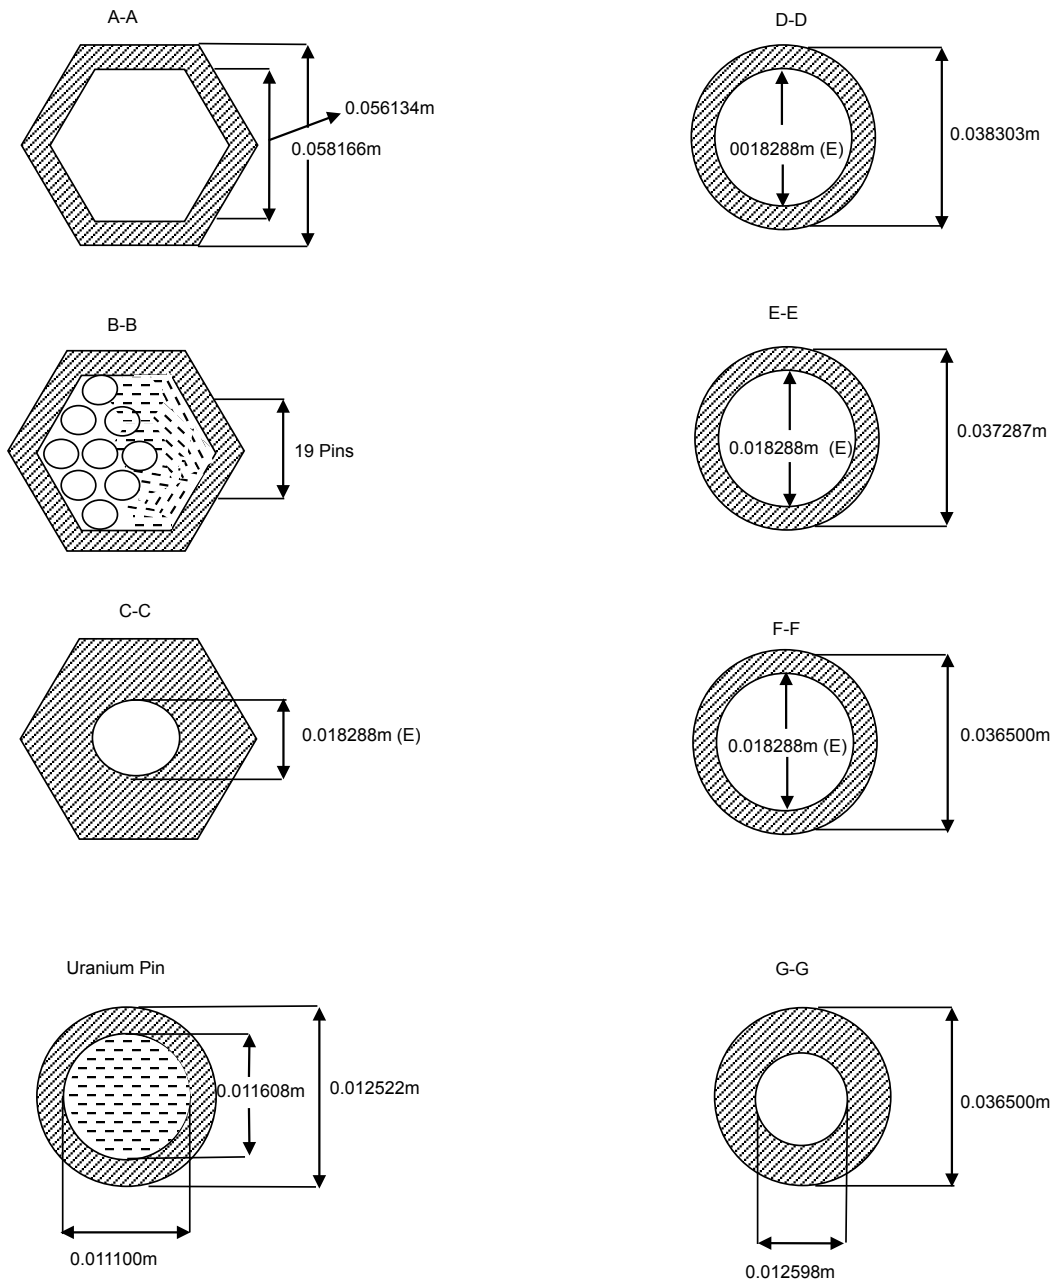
Uranium Outer Blanket plane sections
